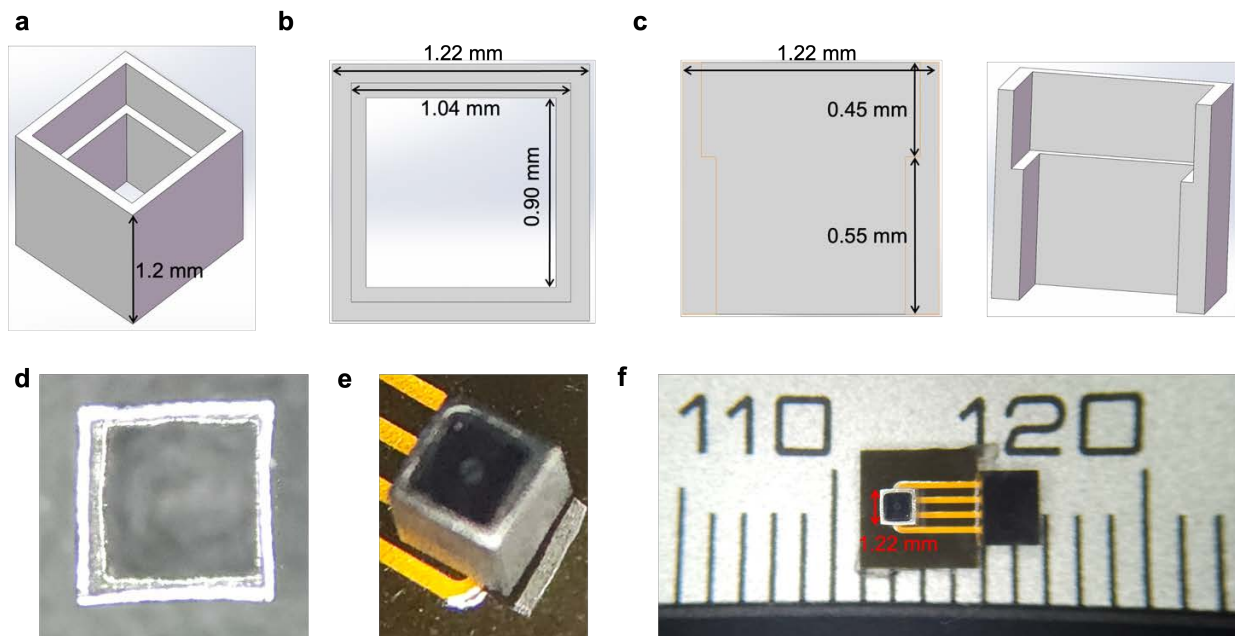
3D-printed metal shell for mounting the nano-lens and imager. The 3D-printed metal shell, with a printing accuracy of $10\ \mu\text{m}$ ($0.01\ \text{mm}$), is used to securely fix the nano-lens and imager. a, Global view of the metal shell. b, Top view of the shell. c, Two cross-sectional views of the shell. d, Optical image of the 3D-printed metal shell. e, Optical image showing the metal shell with the sensor and nano-lens assembled. f, Optical image depicting the placement of a sensor on a ruler, with the miniaturized camera size approximately $1\ \text{mm}$.
